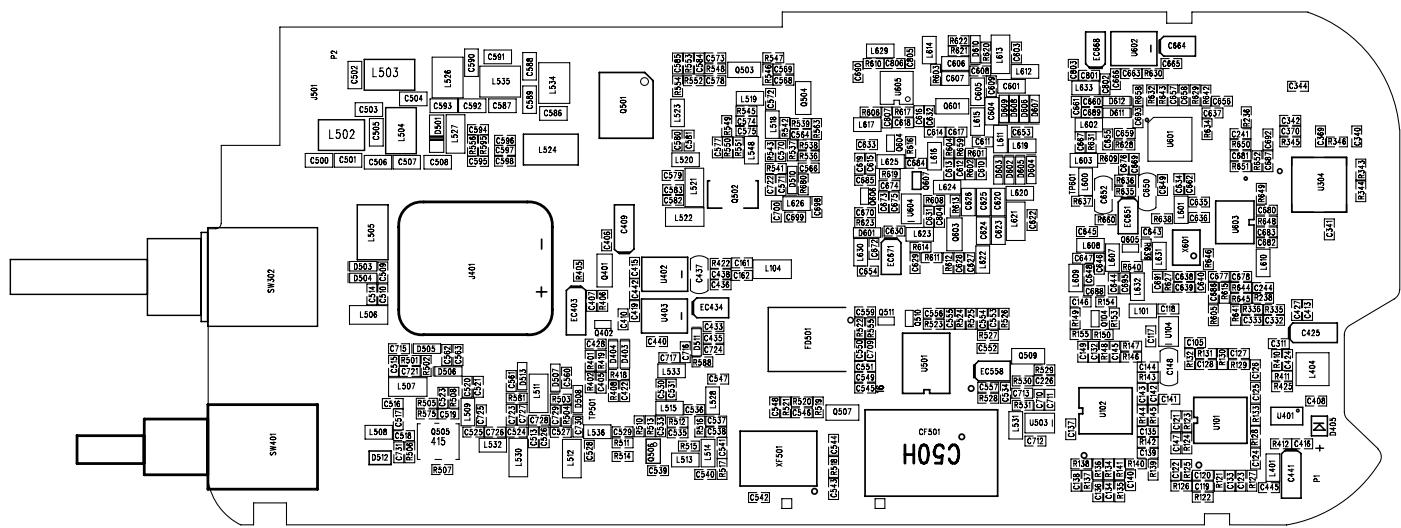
TP660 Main Board Bottom Side PCB View (136-174MHz)
